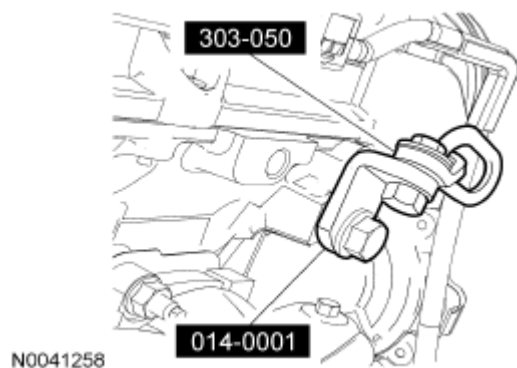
Identifying Special Tools (303-050 And 014-0001)
